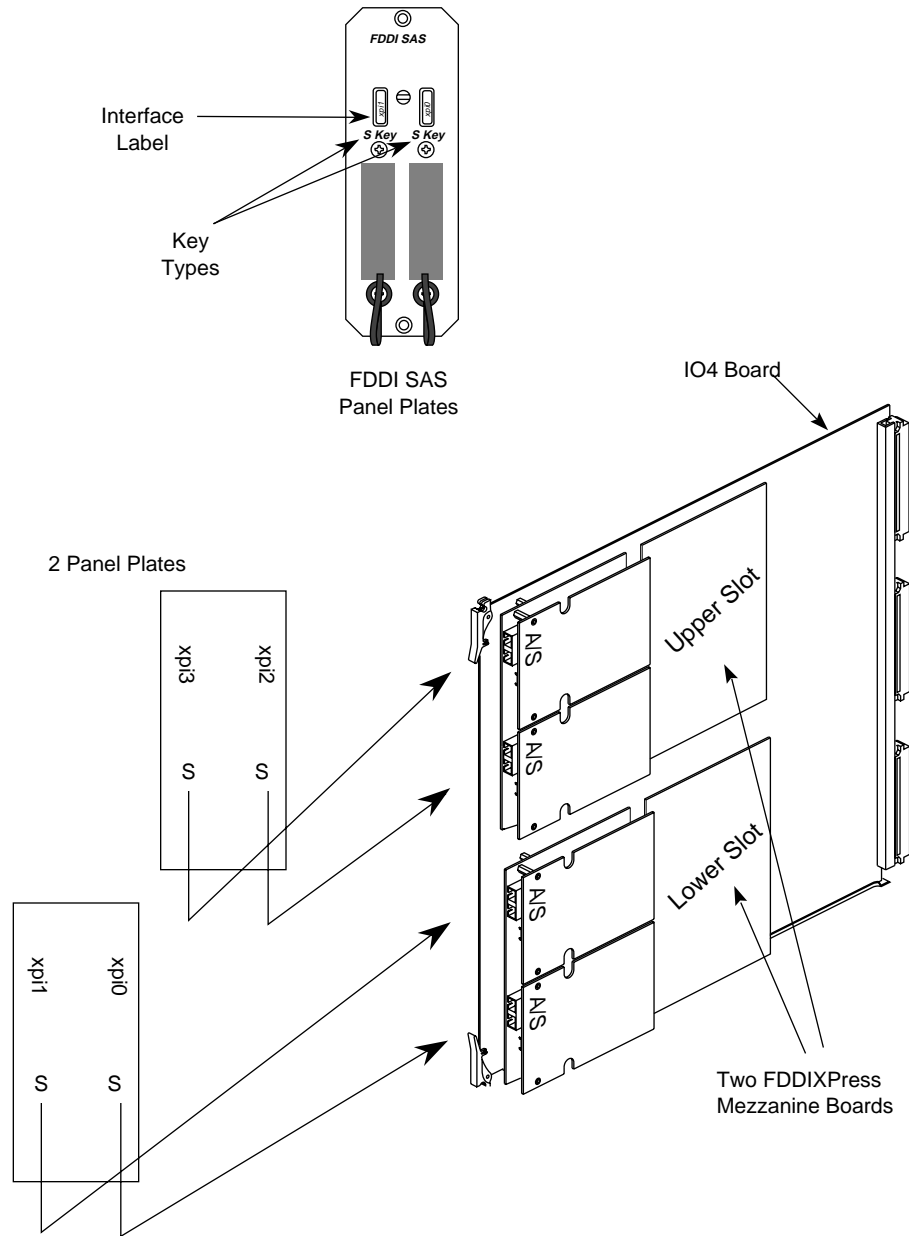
Connecting SAS Internal Cable Assemblies to Board
